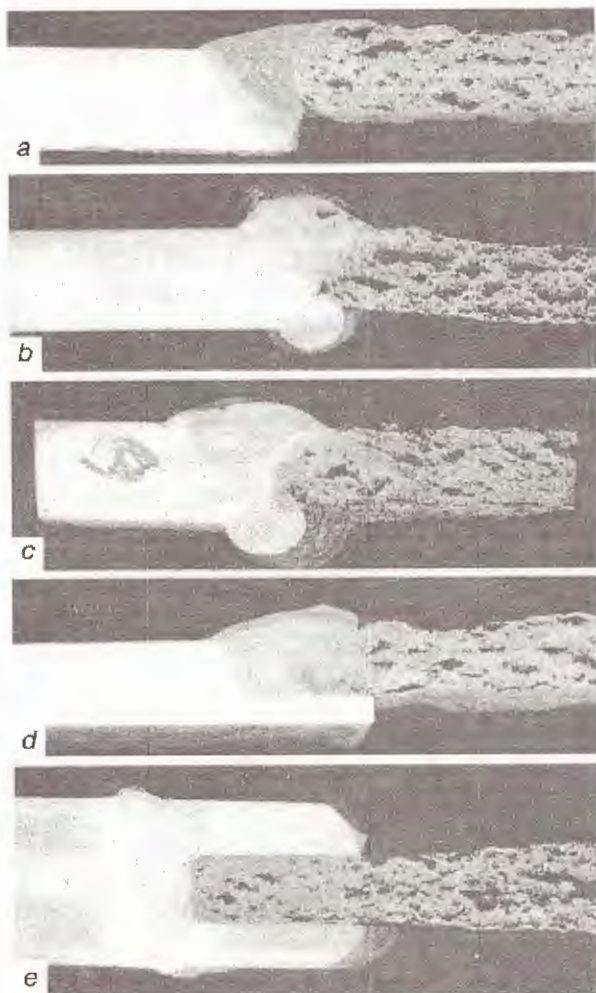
Macrostructure of the joints of foam aluminium with series-produced aluminium alloys, made by argon-arc (*a, b, c, d*) and electron beam welding (*e*) ($\times 2$).
